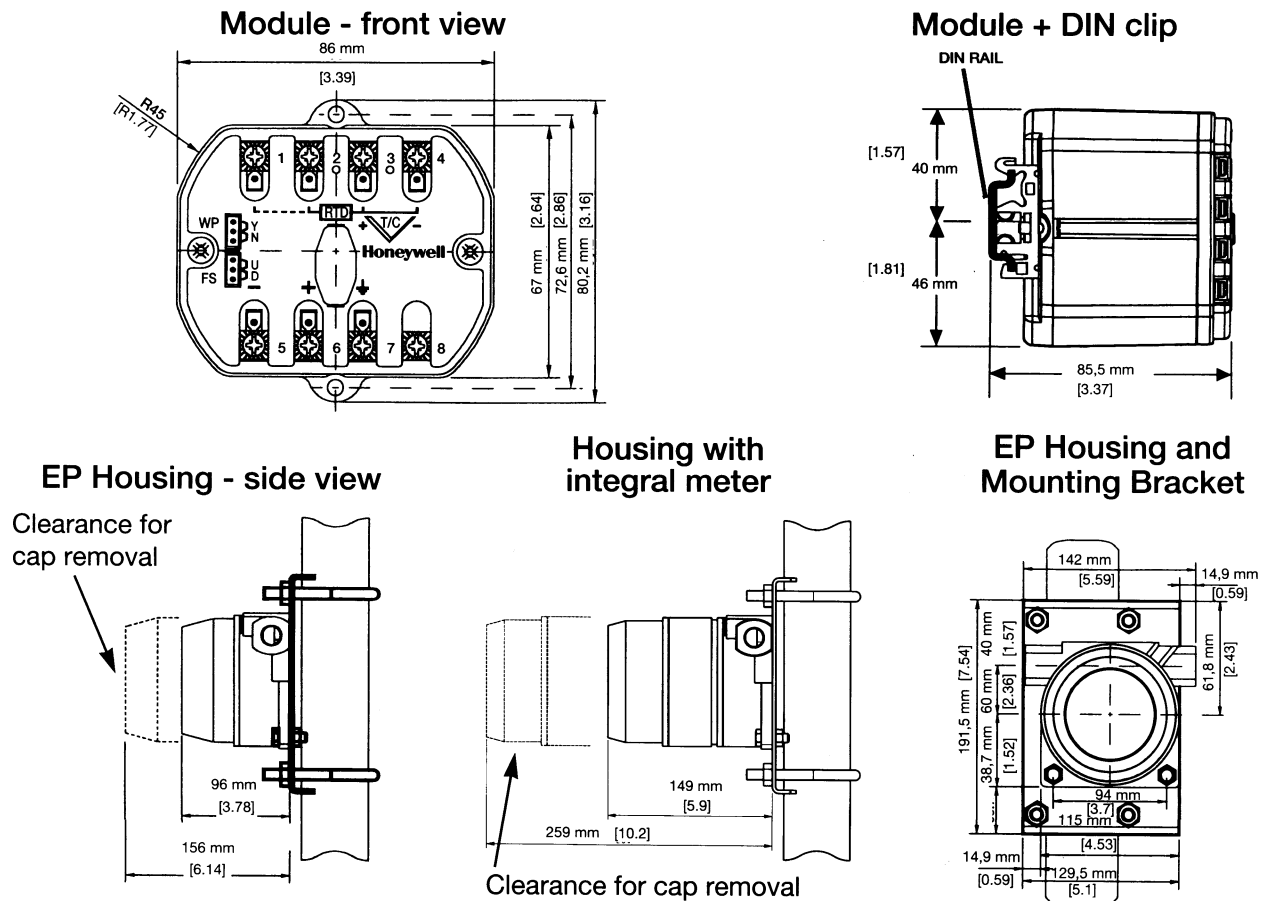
STT350 transmitter and optional flameproof housing dimensions – reference only
